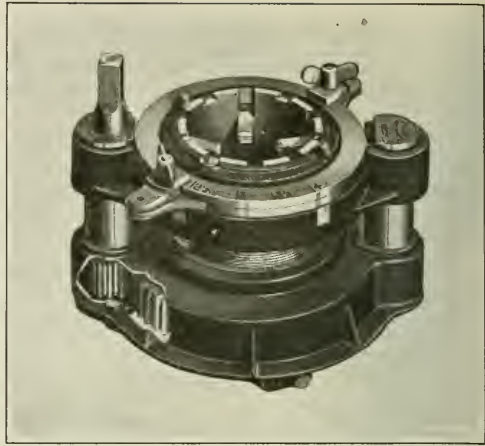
Geared Die-stock for threading Pipe from 2 1/2 Inches to 4 Inches in Diameter
